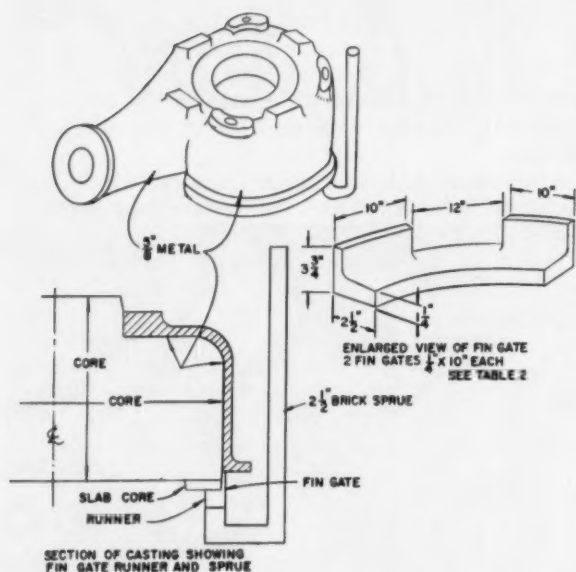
Complex stainless steel casting weighing 840 lbs, with wall section  $\frac{5}{8}$ -inch thick.
